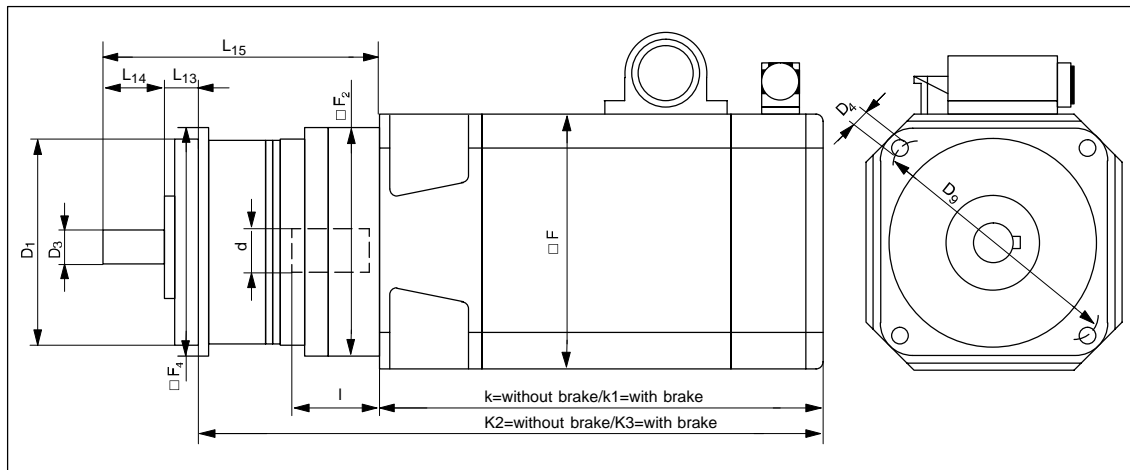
1FT6 series with 2-stage planetary gearbox (alpha company), dimensions refer to Table 3-13
